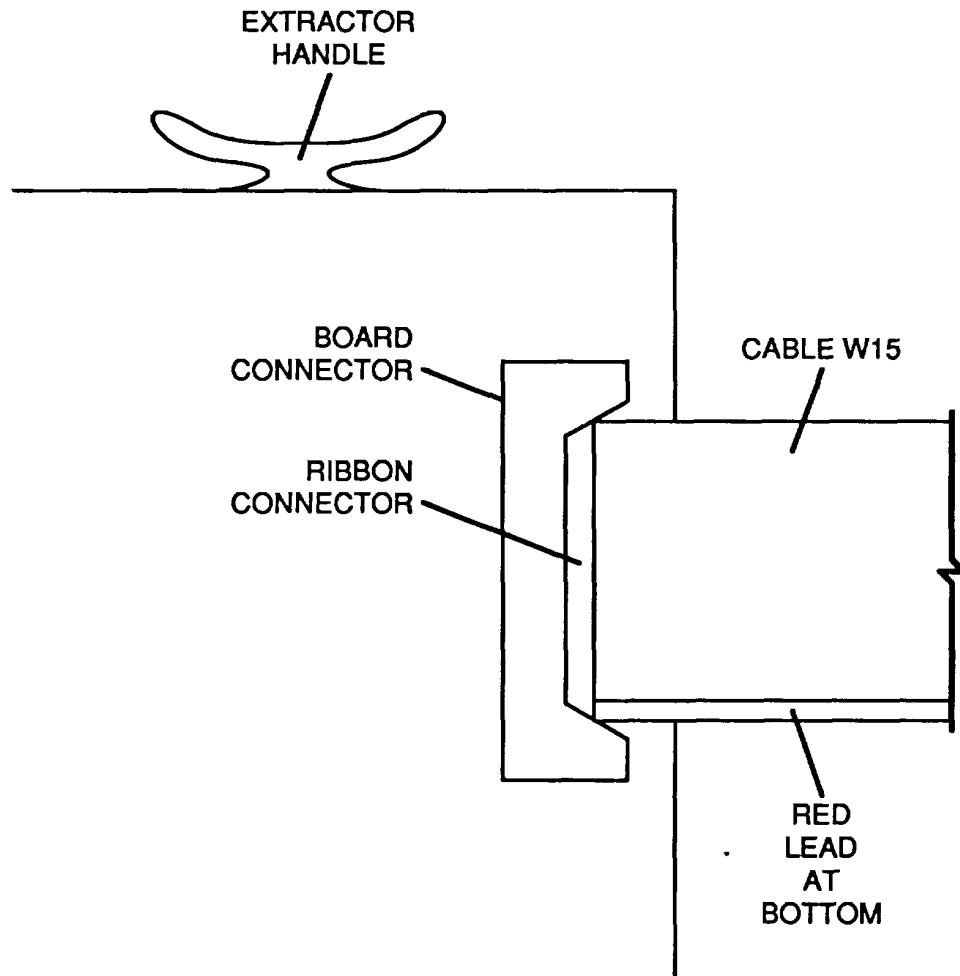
Component Side - Top Right Side of Disk Interface Card CCA
